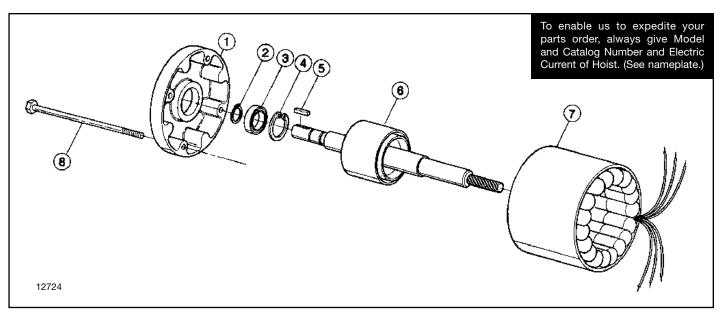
THREE PHASE MOTOR ASSEMBLY
